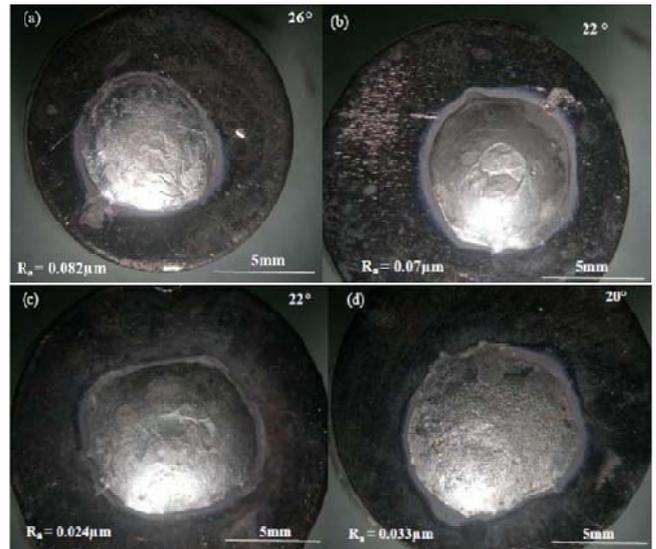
Macroscopic images (top view) of stabilized alloys on substrate surfaces a – b) Sn-0.7Cu solder and c – d) SAC0307 solder
